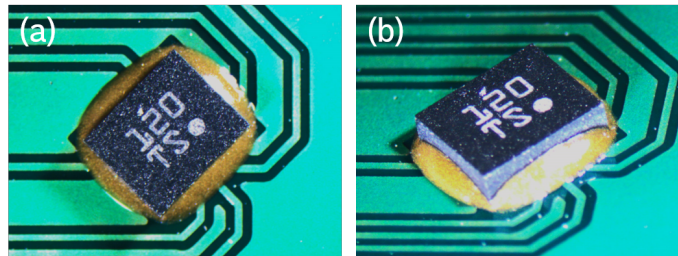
Sensor assembled with ACA 3 (a) Top view (b) Side view
